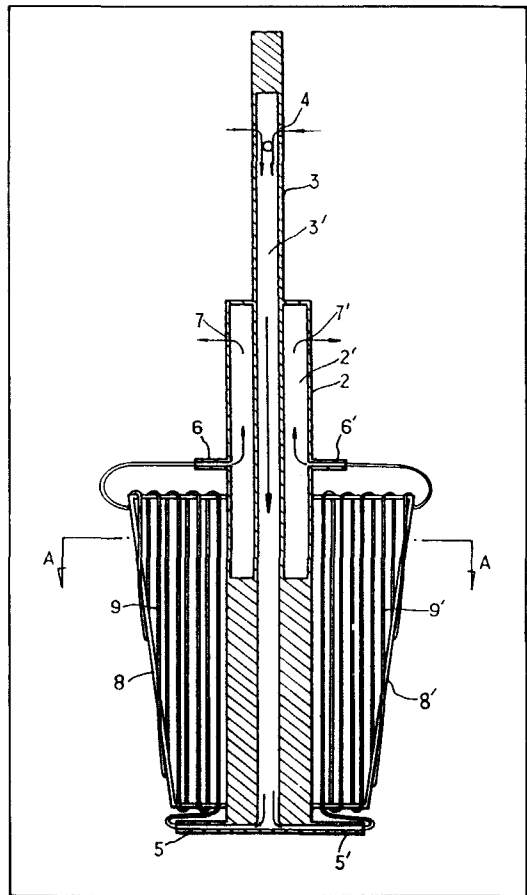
Detail diagram of moving-membrane shaft in Fig. 1.
